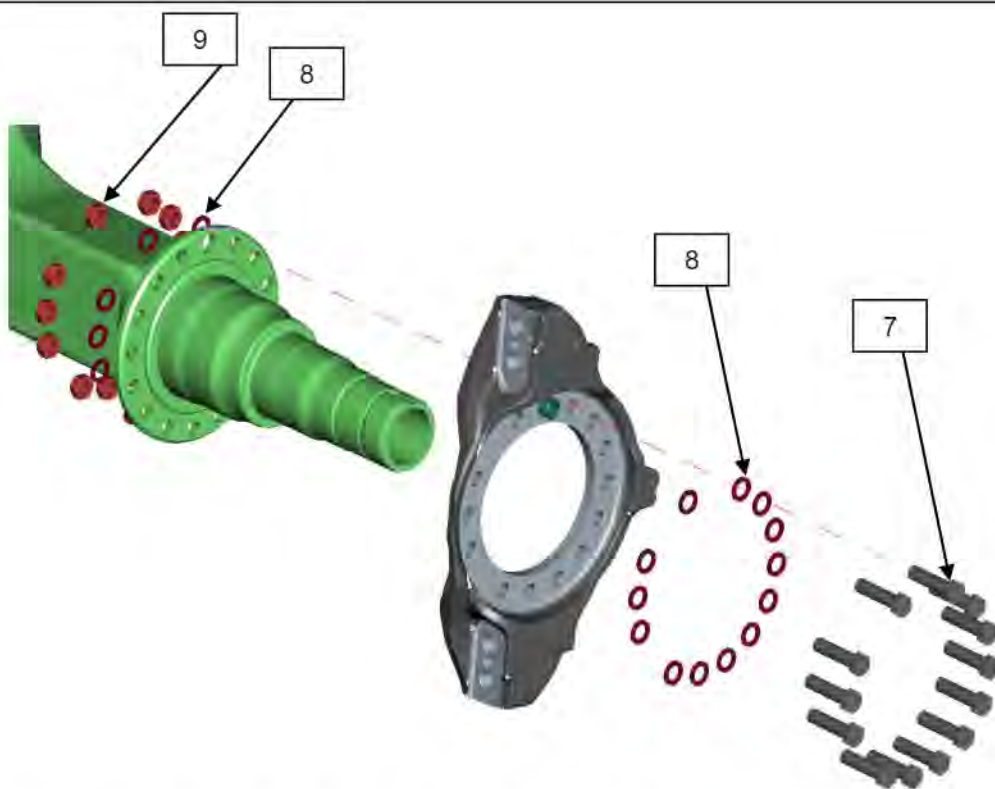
Exploded View of the Axle, and Hardware Needed for the Attachment of the 434 Adapter Plate
